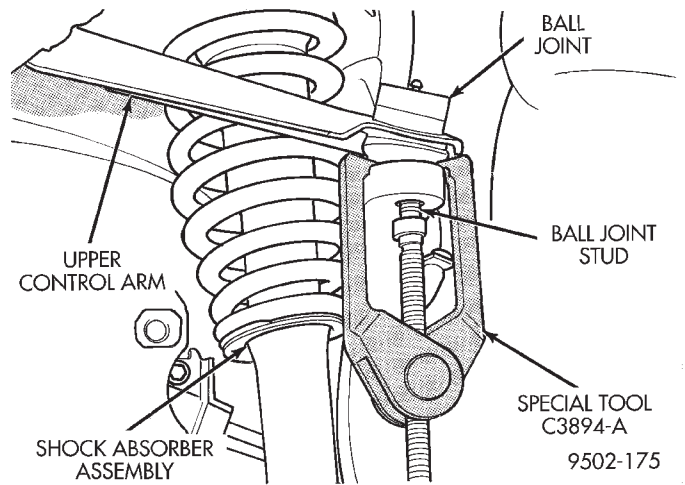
Ball Joint Stud Removal From Steering Knuckle
